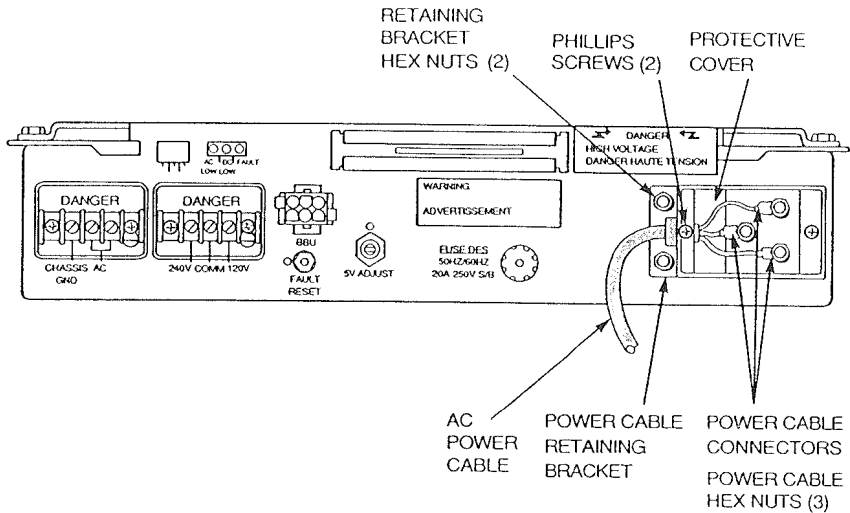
TL1A10113 POWER SUPPLY REMOVAL
